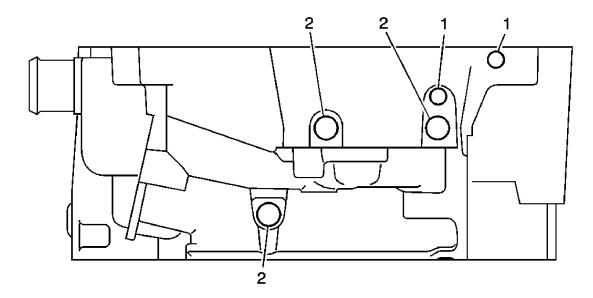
Identifying Bolt Size & Locations On Cylinder Head - Front Courtesy of GENERAL MOTORS CORP.
